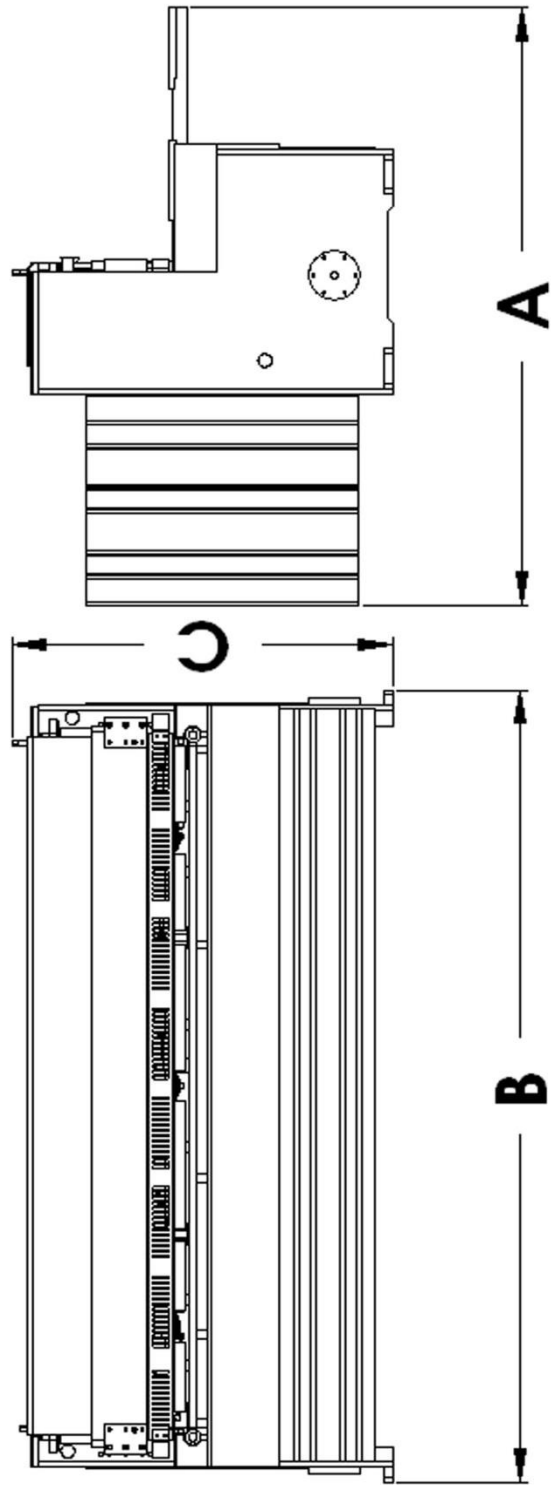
A SERIES Gear Motorized Guillotine Shears
